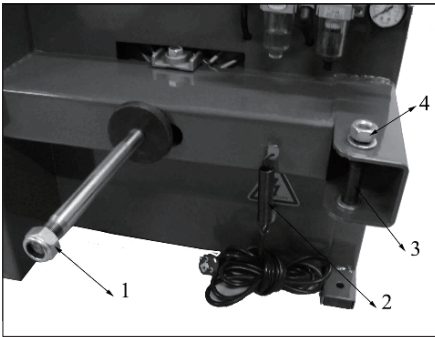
Unscrew the fastening nut [1] at the front end of large cylinder piston rod, take off the bolt and nuts [3] and [4] fixing the arm and hang the tension spring [Fig. 4-5-2]
